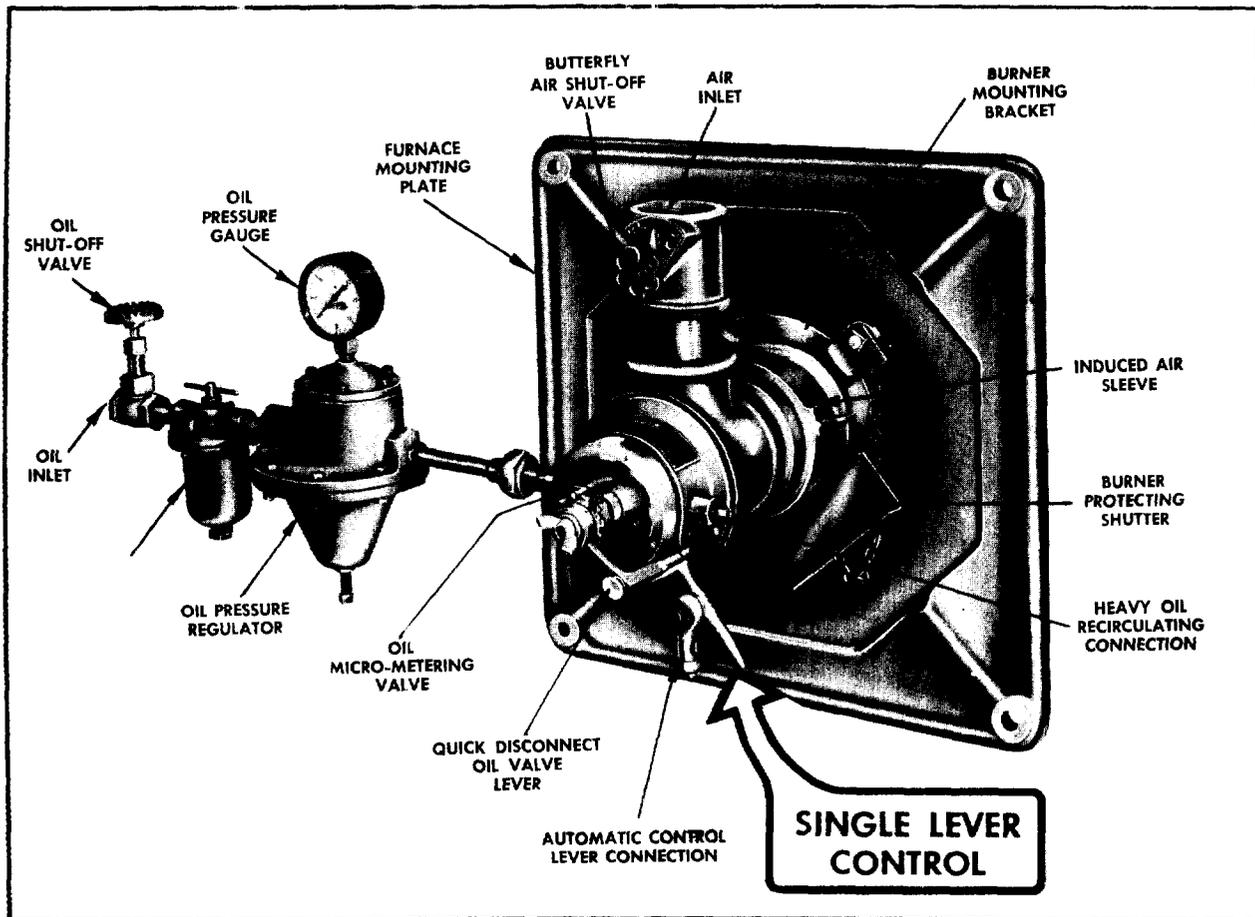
Hauck Proportioning Oil Burner* (No. 779 to 786) Complete with Furnace Mounting Plate.
